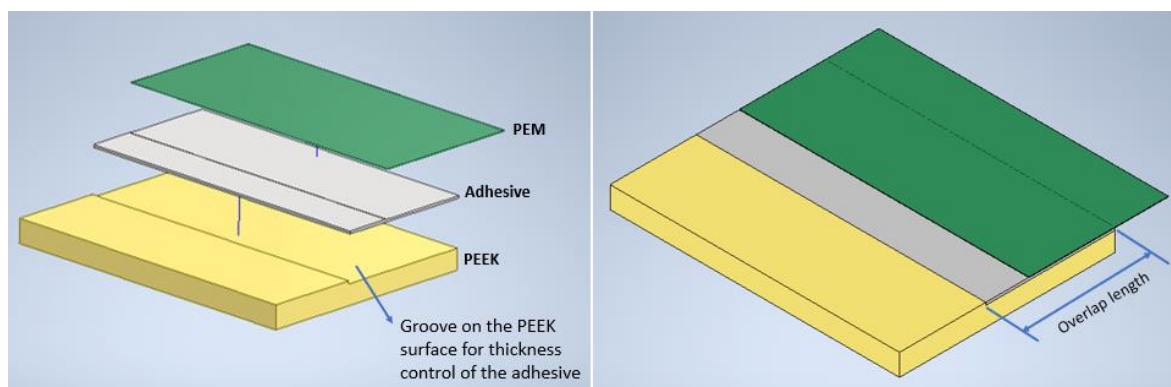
Joint design concept: exploded view (left) and assembly (right).
